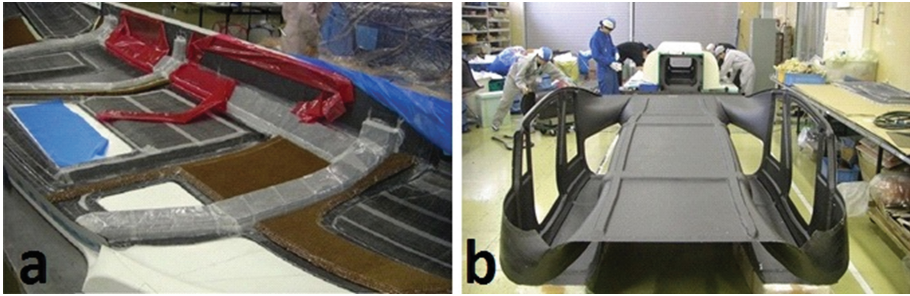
Vacuum bagging (a) and post cured (b) monocoque chassis for a solar car [3].
